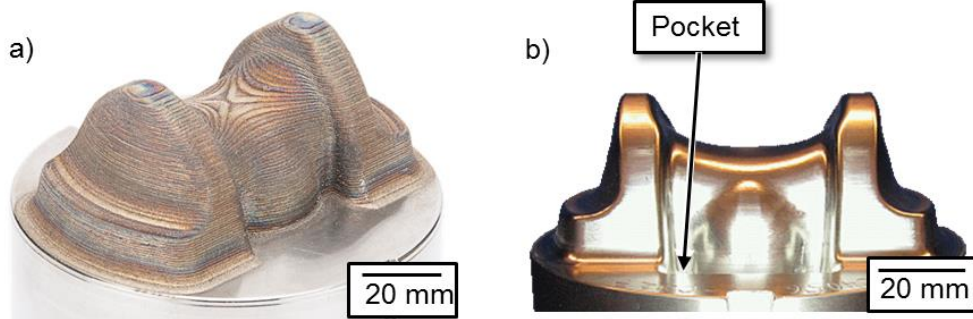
a) Hybrid tool with machined base body and additive manufactured active element and b) hybrid tool after machining
